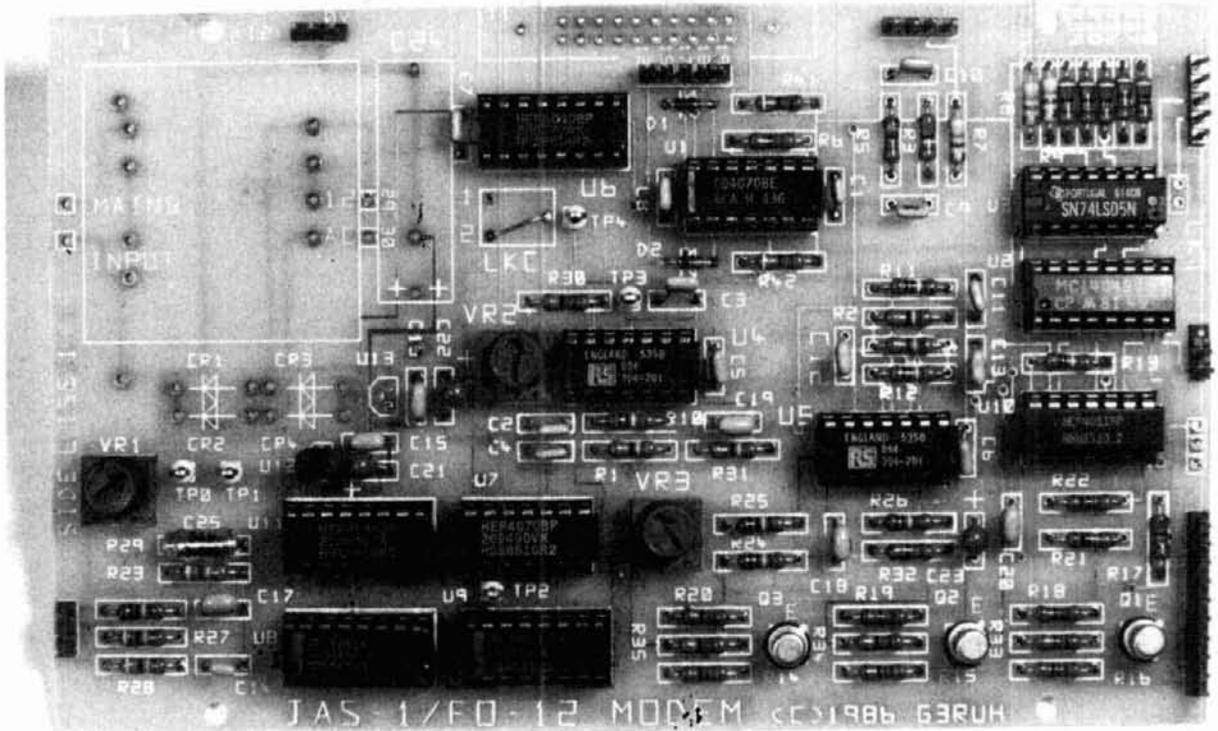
Photo D. Completed circuit board. AC power supply components have been omitted; link LKC is shown for a TAPR TNC-2.
